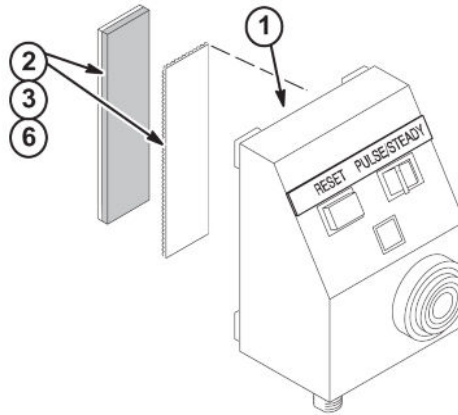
Control Box Installation On Wall Or Under Shelf
